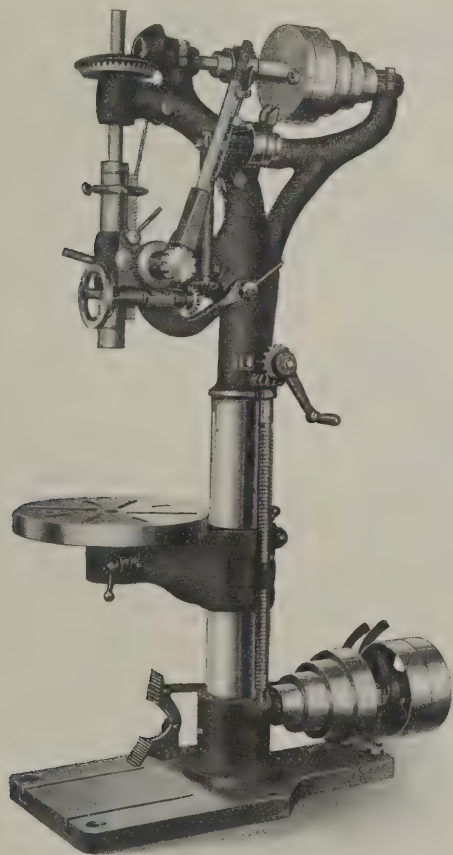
Upright Drilling Machine built by Richards Machine Co.
